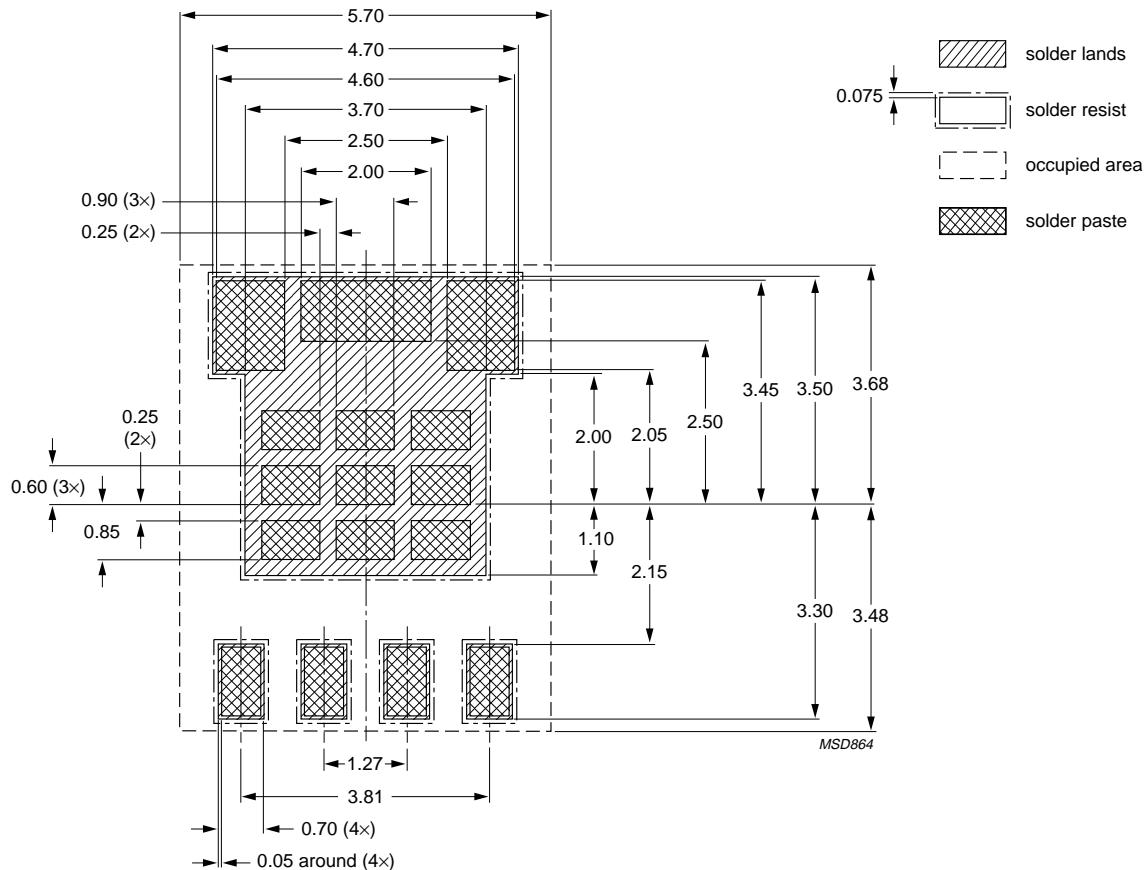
SOT669 (LFPAK) optimized soldering footprint
